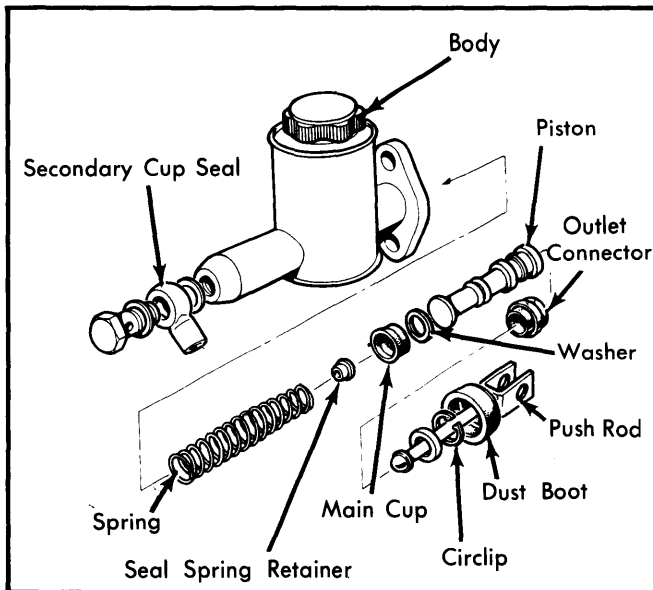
Exploded View of MGB Clutch Master Cylinder
